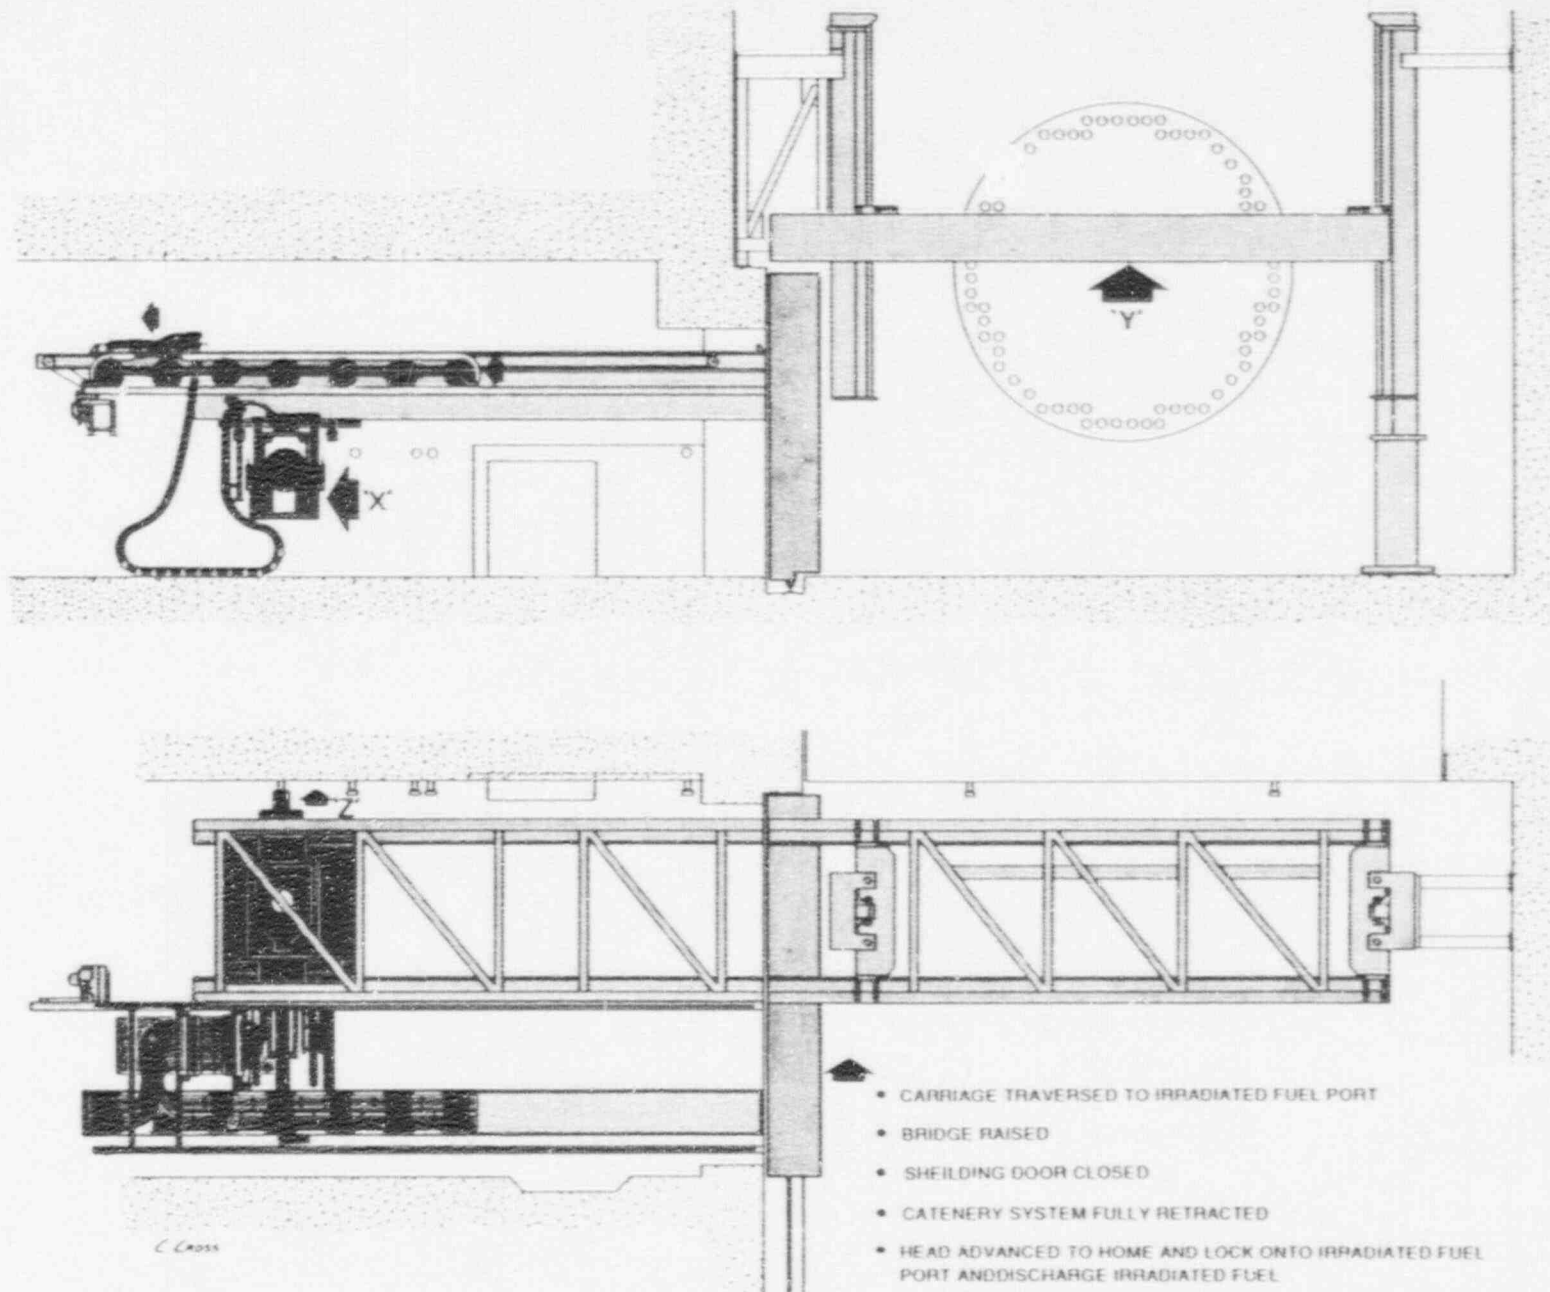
FUELING MACHINE AT IRRADIATED FUEL PORT
